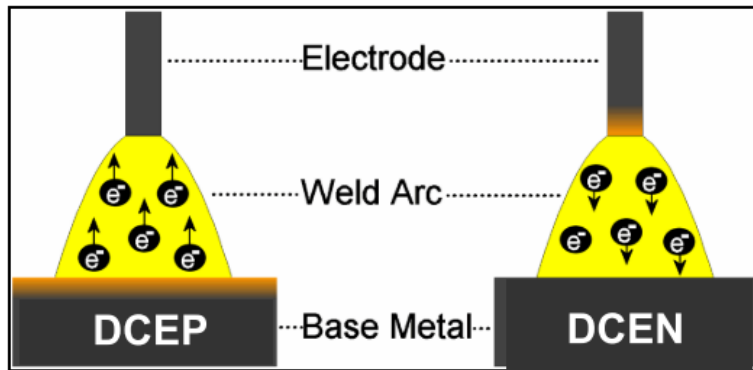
Schematic of polarity for a welding process of a consumable electrode [38].
